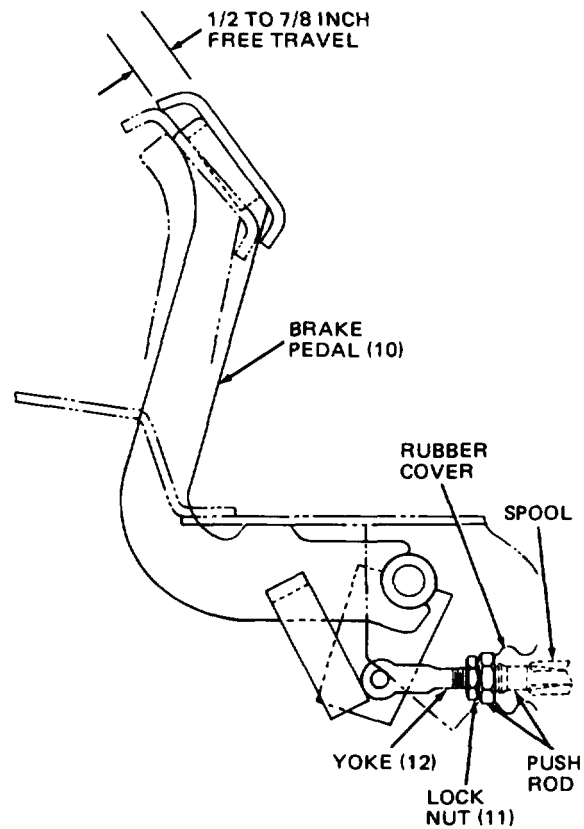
Brake Pedal and Declutch Pedal Assembly.
